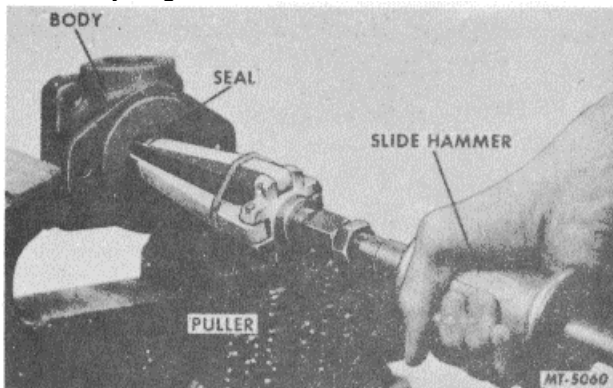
Removing Shaft Seal Using Puller SE-1961.
